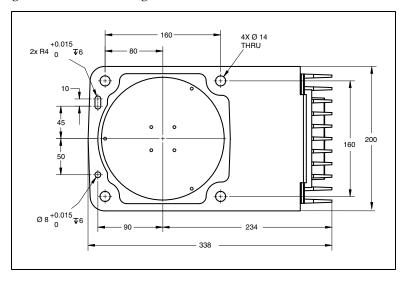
Mounting Hole Dimensions, Upright Robots
